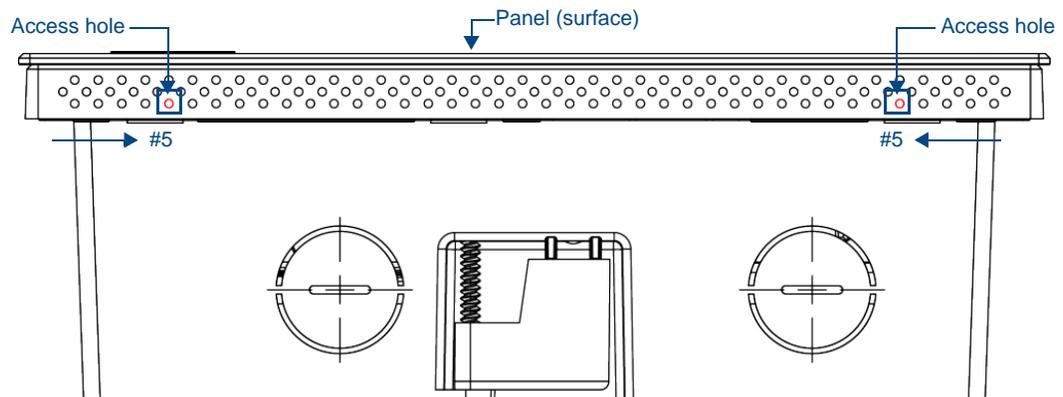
Bottom View (Landscape) or Right-Side View (Portrait) of the MXD-700 showing access holes in molding
